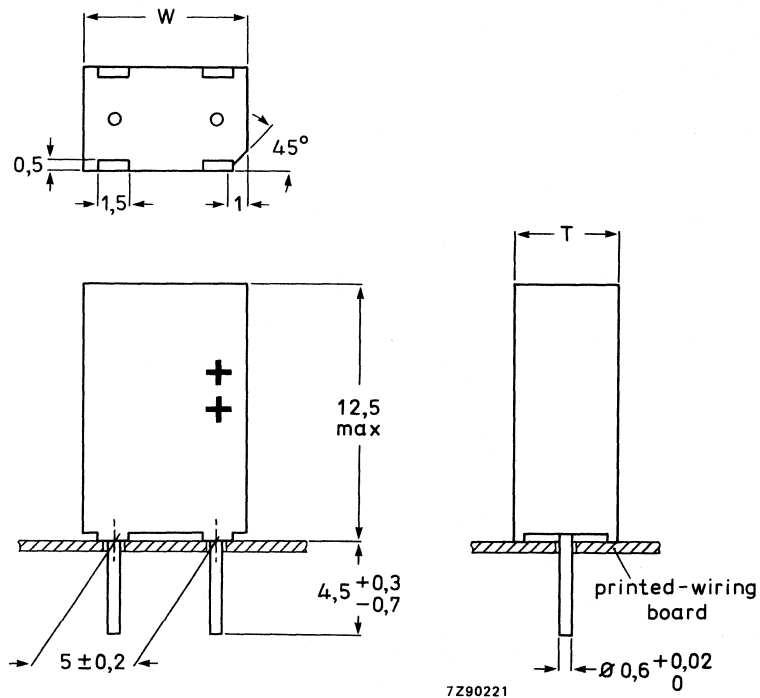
Style 1; see Table 1a for dimensions T and W.
